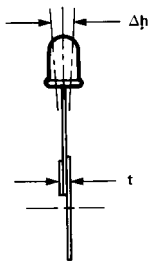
Front to Rear Alignment and Tape Thickness, Typical All Device Types.
